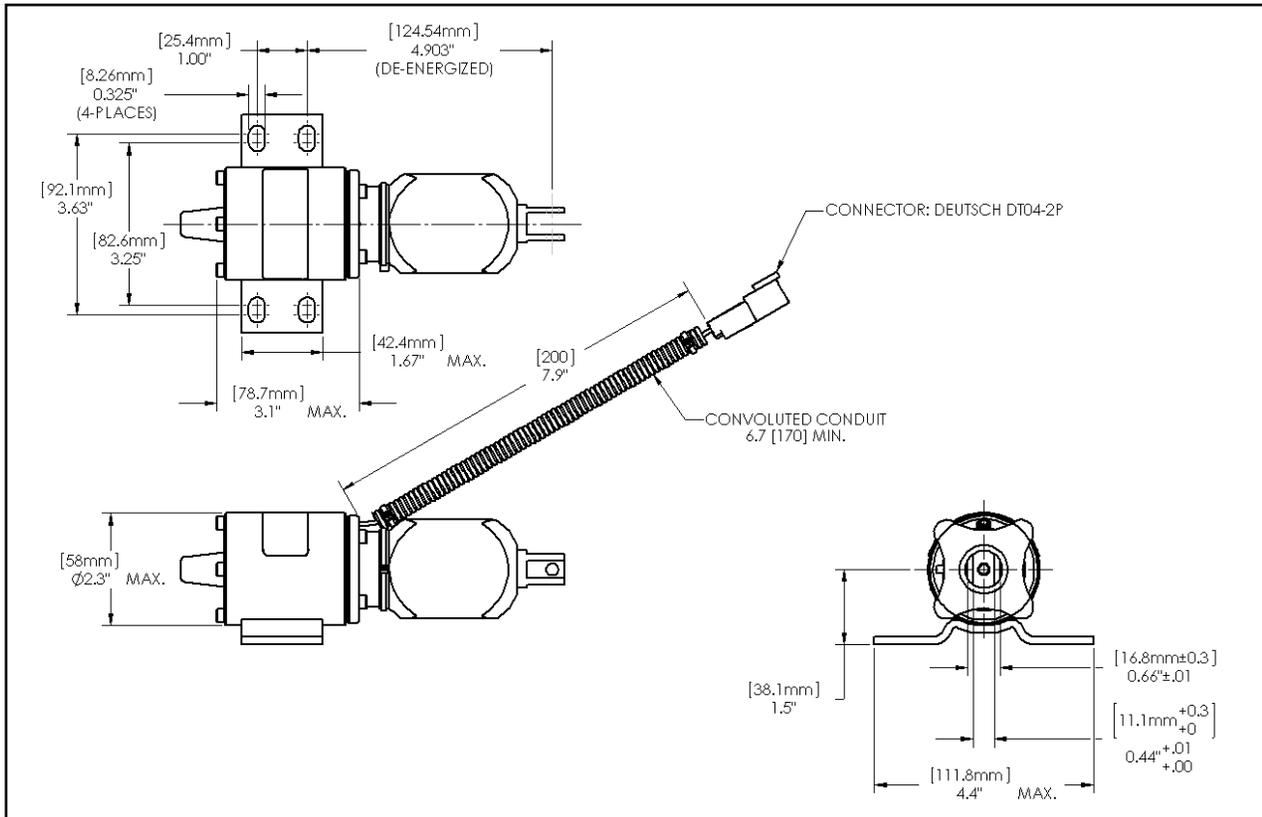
0225 Actuator Dimensions (shown with Sheathed Leads)
